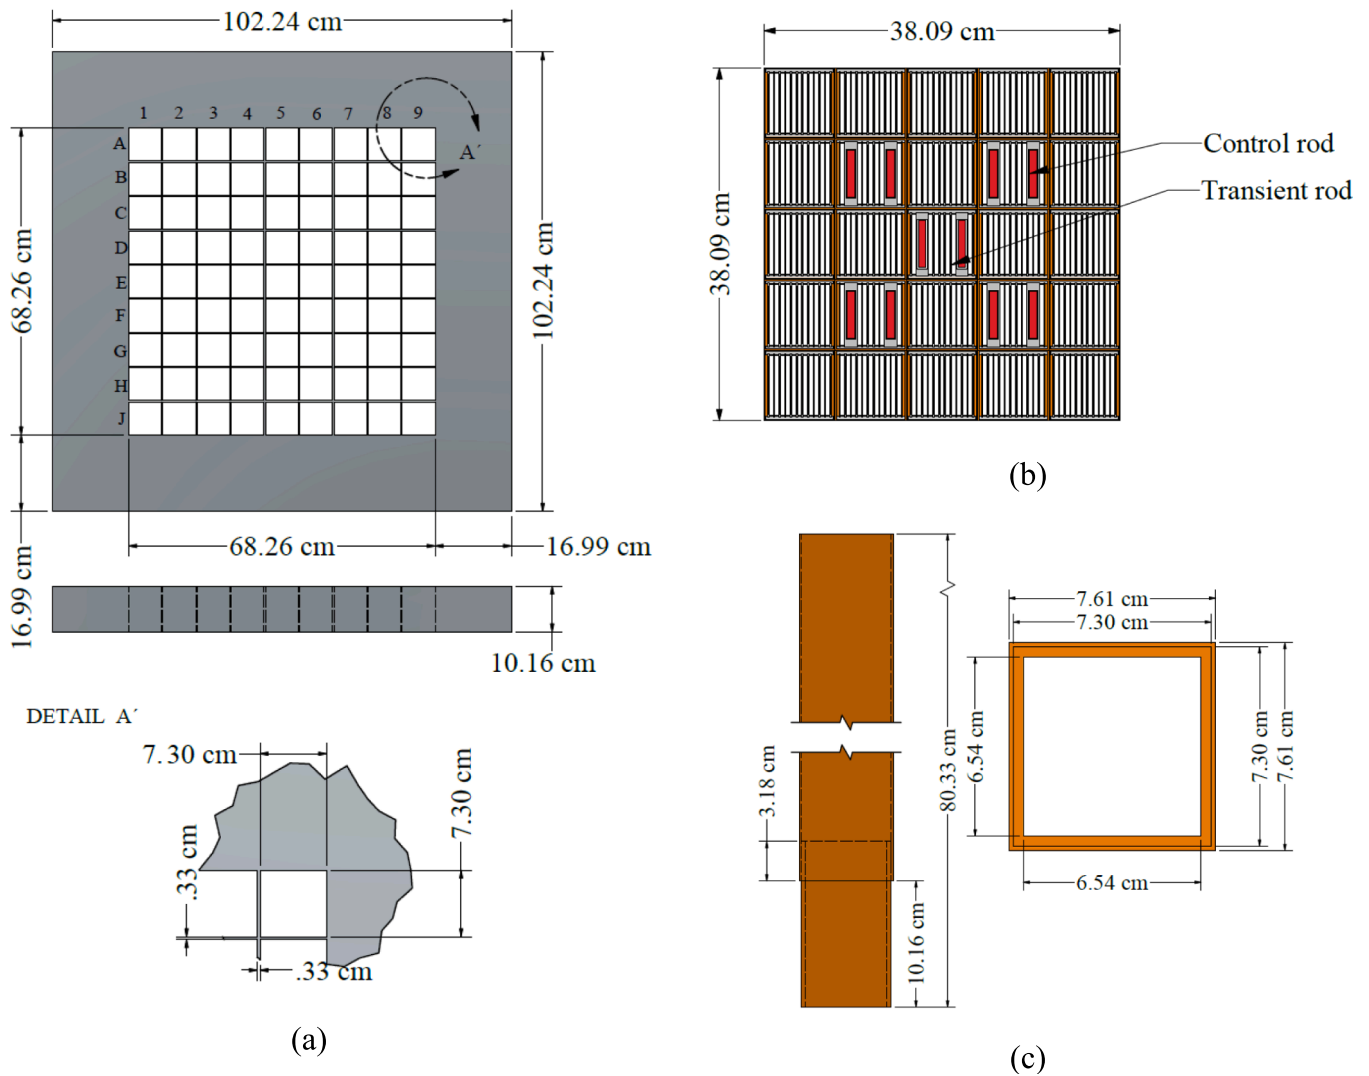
SPERT IV dimensions in cm of: (a) lower grid; (b) core; (c) assembly can.
